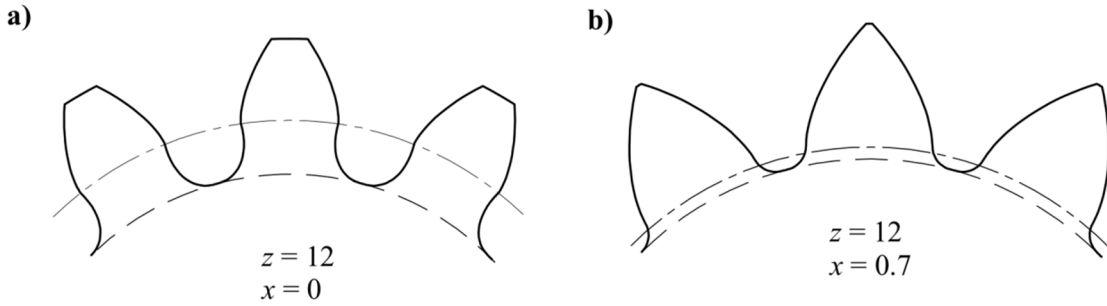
a) undercut gear teeth; b) sharpened gear teeth
